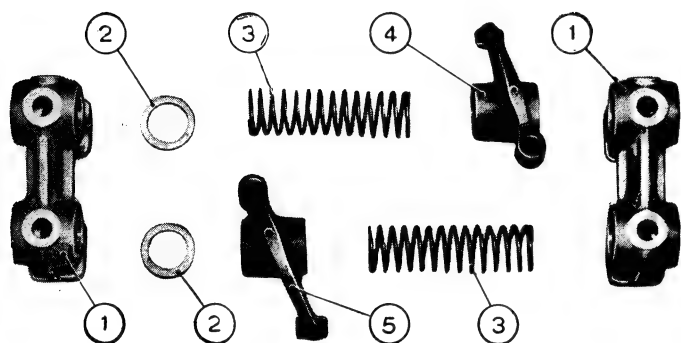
Components of a valve rocker assembly (engine 115 C.005).
